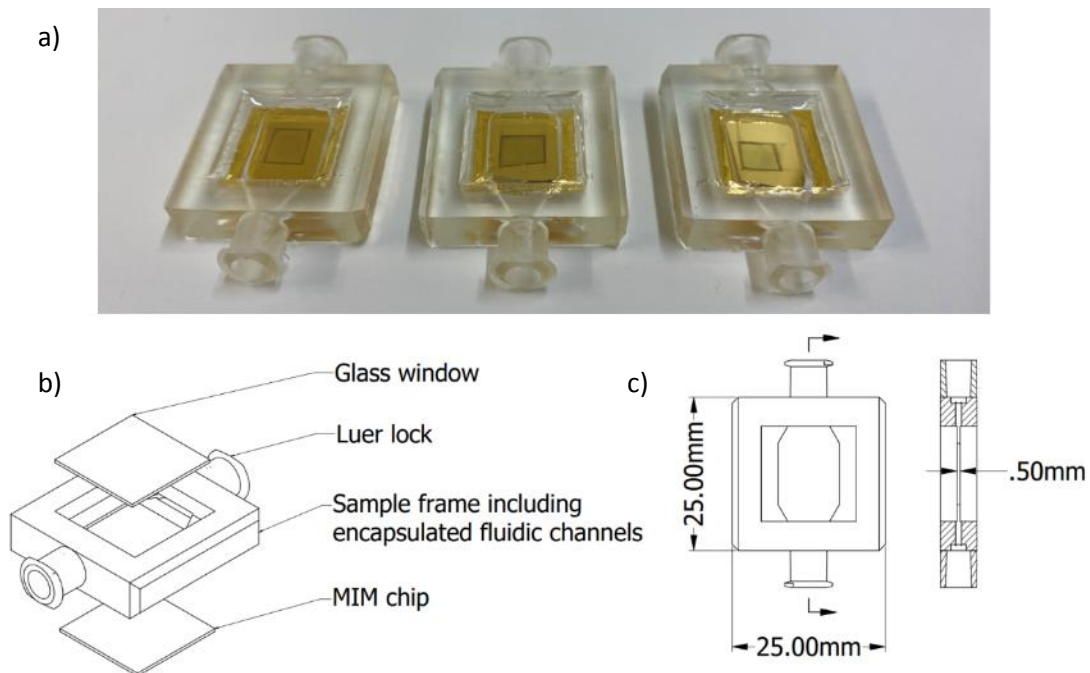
Encapsulated channel microfluidic assembly. a) Photograph of three assembled encapsulated fluidic channels. b) Expanded view of encapsulated channel components and c) details of sample frame showing device width, length and minimum channel dimension.
